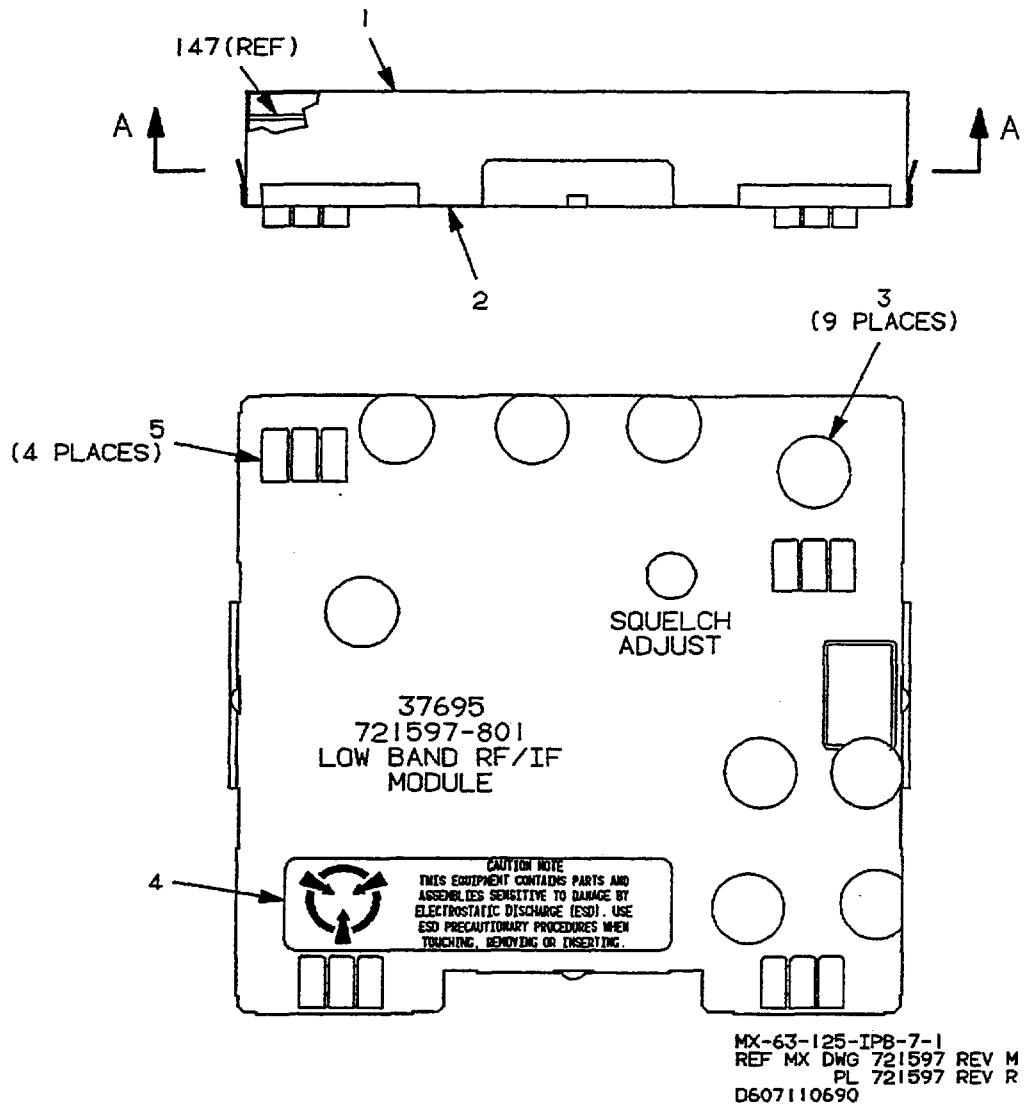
Low Band RF/IF Module Assembly (Sheet 1 of 7)
